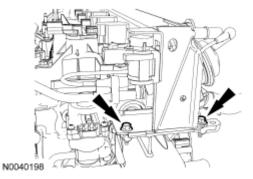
Locating Pump Assembly Bolts Courtesy of FORD MOTOR CO.
